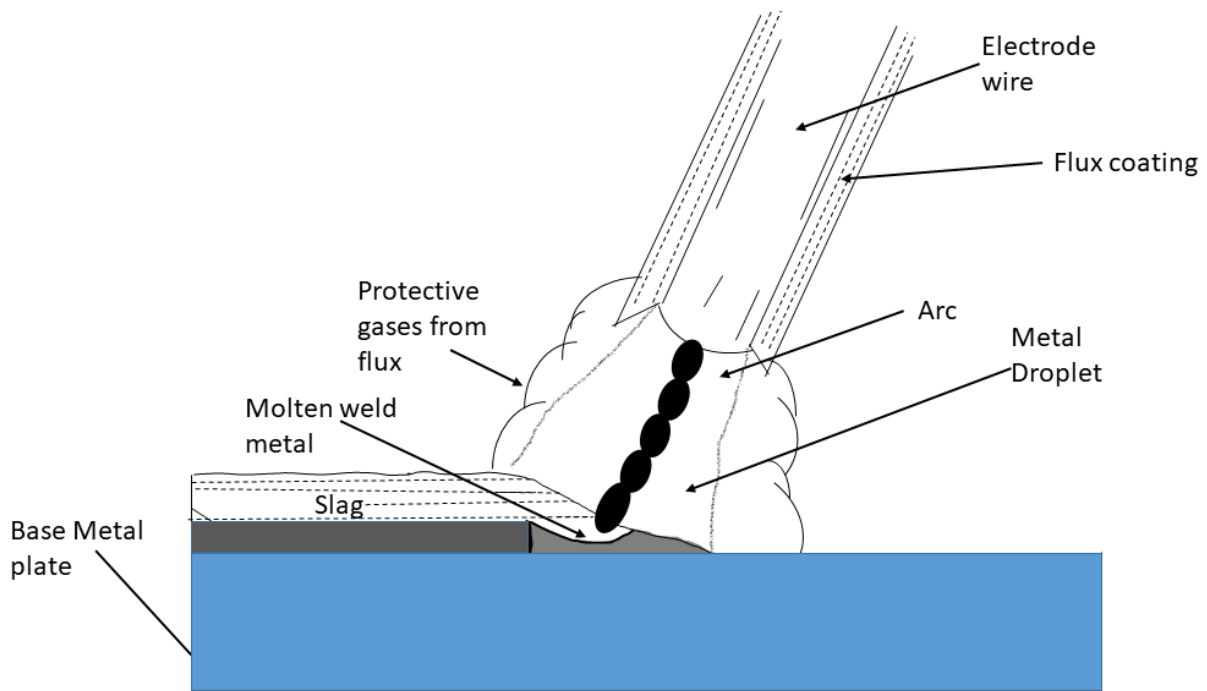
Welding and Allied processes (From: Welding science and technology by M Ibrahim Khan) [1]
